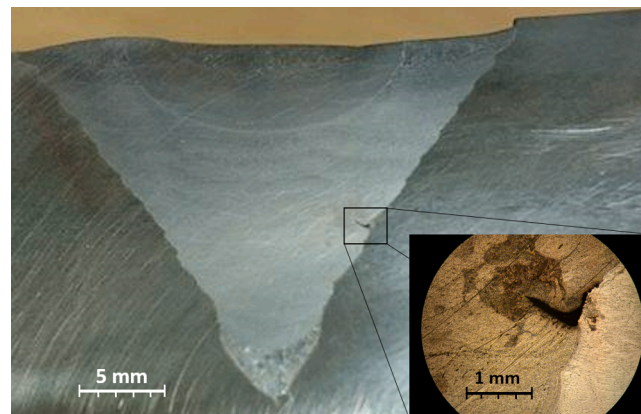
Cross-section of the workpiece used for validation and the microscopic image of the welding defect (slag inclusion due to lack of fusion).
